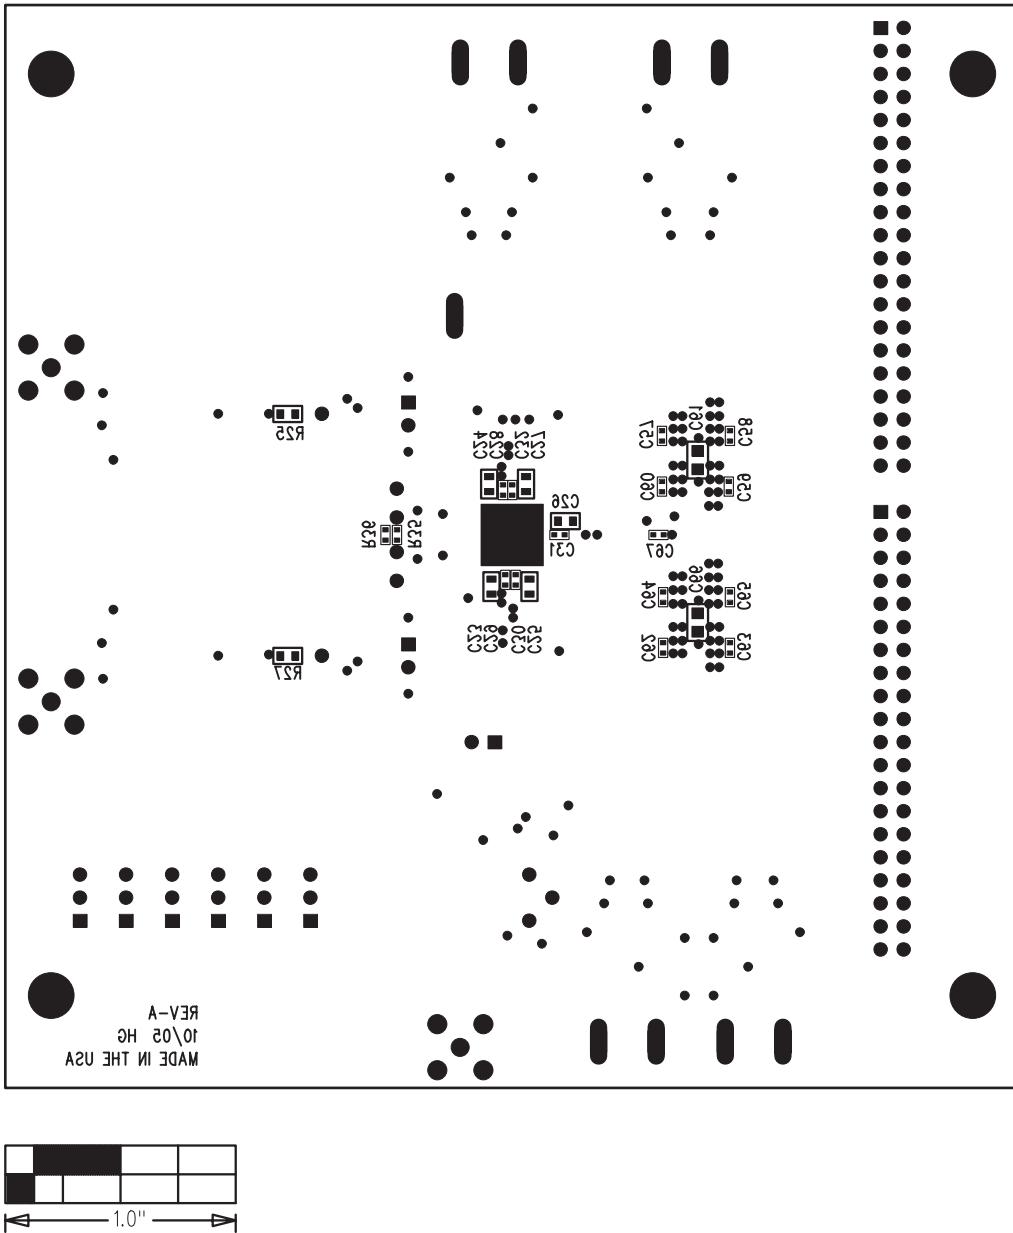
MAX12527/MAX12528/MAX12529/MAX12557/MAX12558/MAX12559 EV Kit PC Board Component Placement Guide—Solder Side
